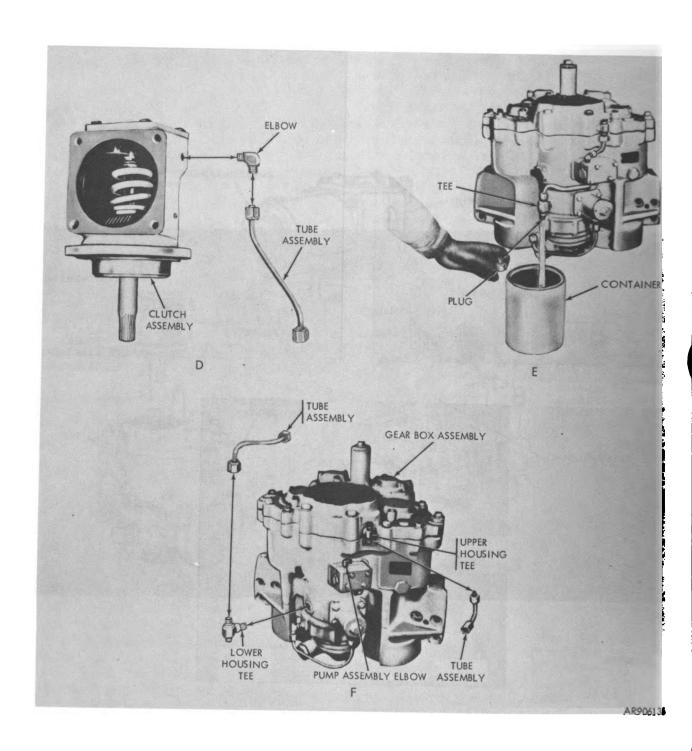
Traversing gearbox disassembly or assembly (3 of 15).
